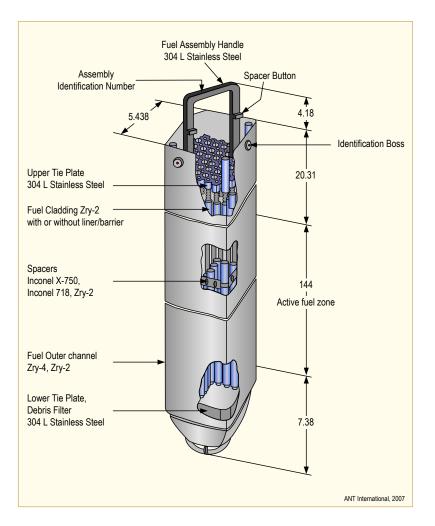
Typical BWR fuel assembly. All dimensions are in inches [Rudling & Patterson, 2009].
